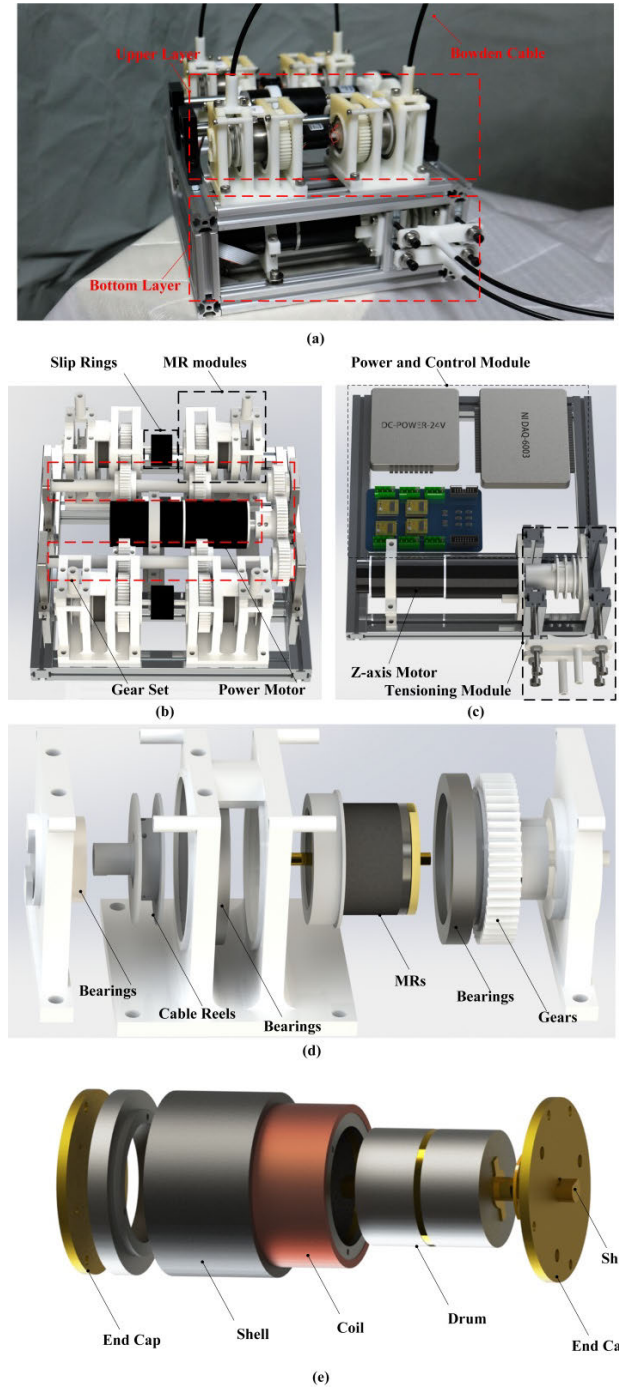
The drive system: (a) the prototype of the drive system, (b) the upper layer, (c) the bottom layer, (d) the exploded view of the MR-Cable unit, (e) the MR clutch assembly.
